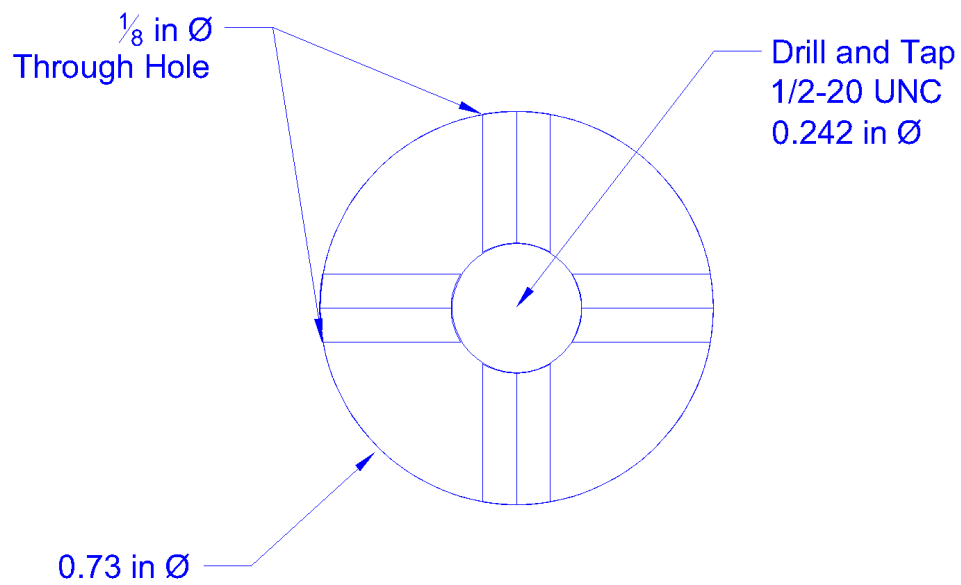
Aluminum Retaining Nut Face View, Dimensions in inches (Misilo III, 2018)
